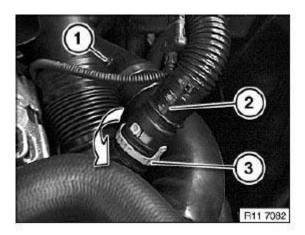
Identifying Air Hose Installation Position Courtesy of BMW OF NORTH AMERICA, INC.
